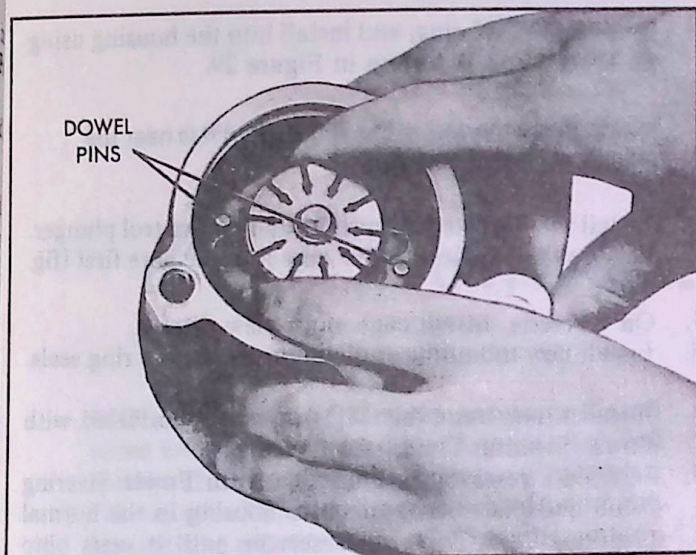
Installing Shaft, Thrust Plate, and Rotor Assembly
